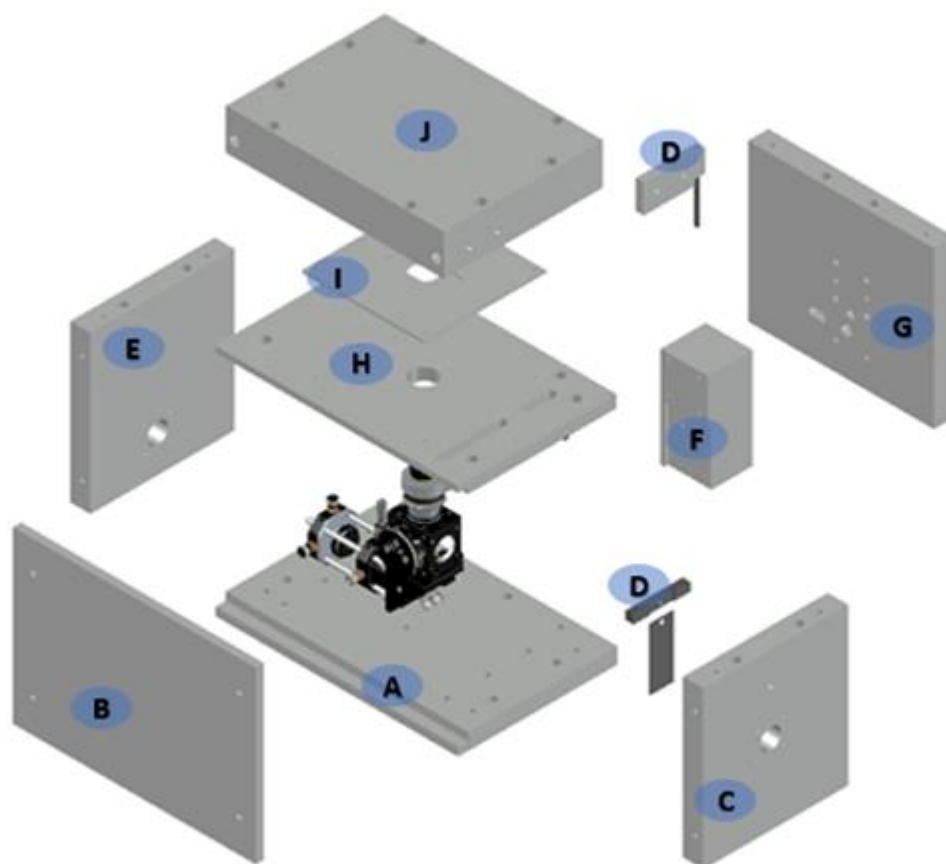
An exploded view of the aluminium box with components labelled according to Table 2.3.4.
